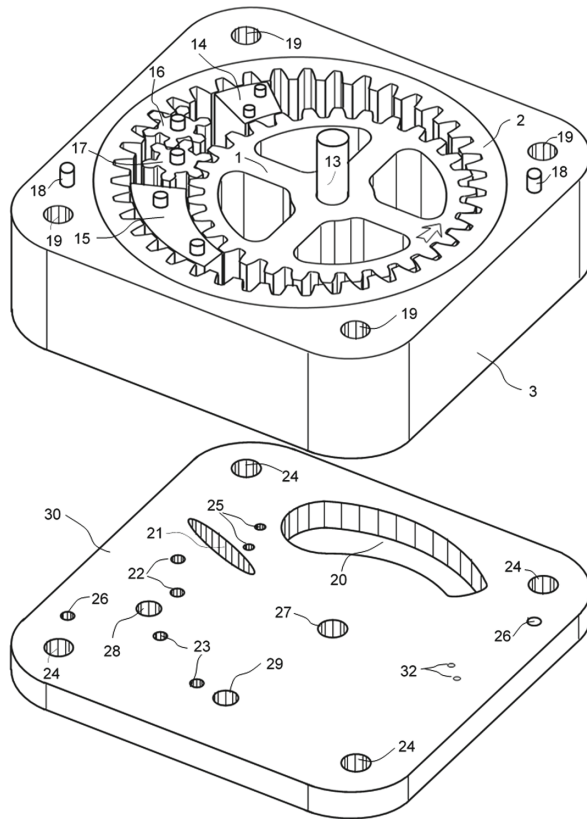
3D drawing of the suggested rotary piston engine without the top cover.
